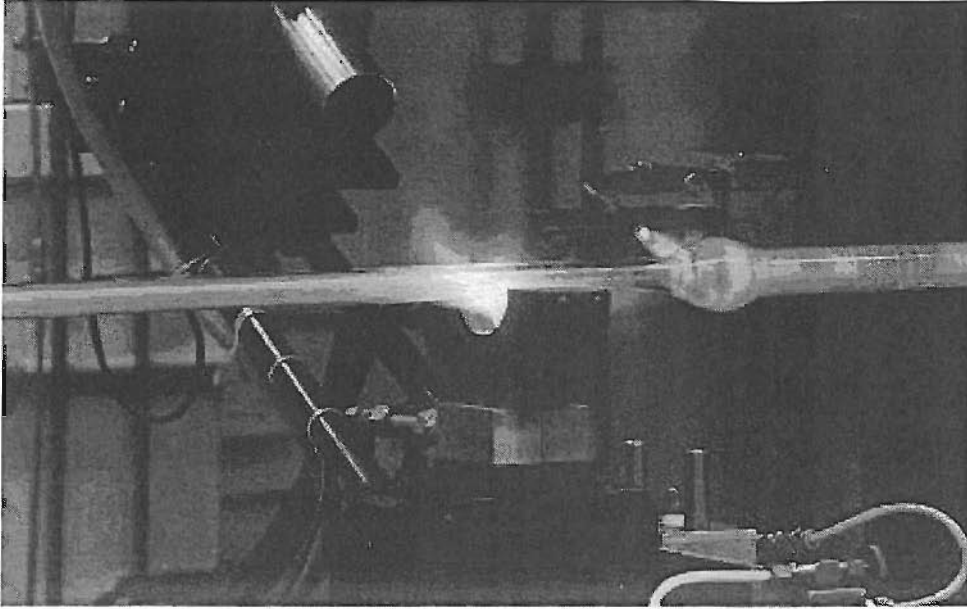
A glass capillary tube being rotated and passed over a lathe.
